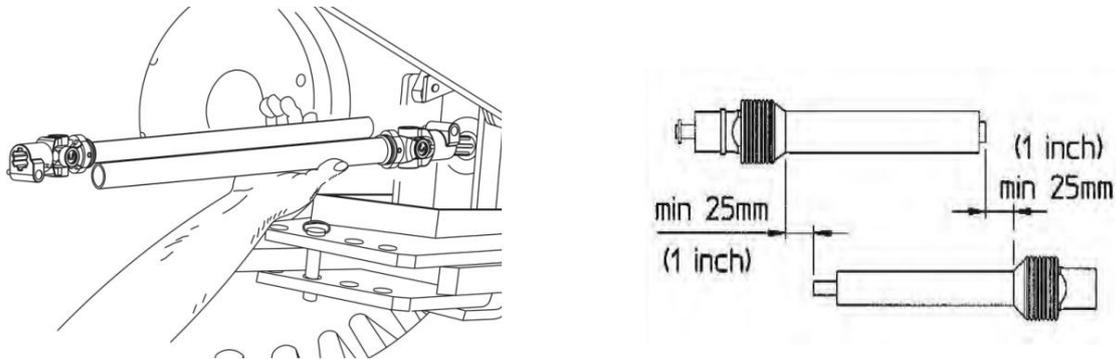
Ex. adjusting the length of the cardan shaft
